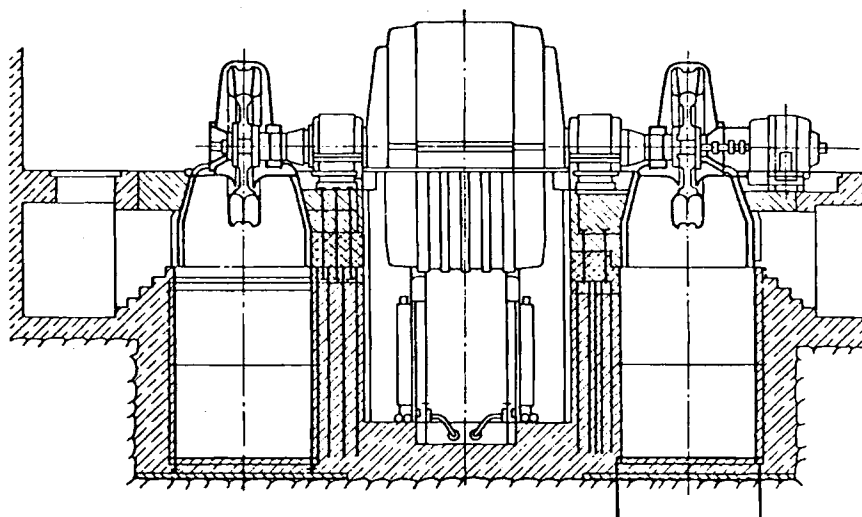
Elevation of horizontal shaft, 2-wheel PT of Biasca, Ticino, Switzerland, overhung design, 1 nozzle per wheel, $H = 707$ m, $P = 4 \cdot 79$ MW (Drawing Courtesy Sulzer Escher Wyss).
